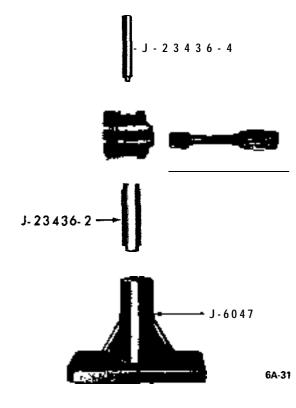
A-3 1 Piston Pin Removal Tool Layout - 1 .9 Engine
